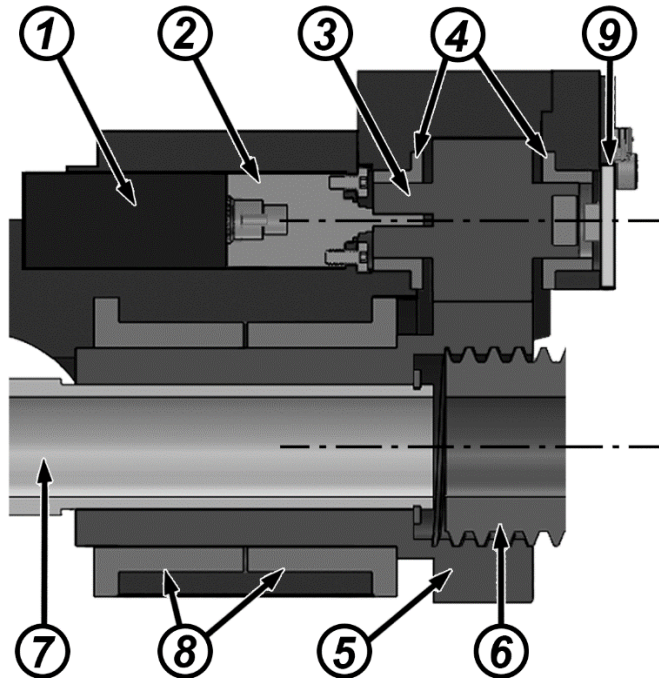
Cross-section of servo subsystem, showing: (1) brushless DC motor; (2) planetary gearhead; (3) pinion; (4) pinion bearings; (5) output gear; (6) nozzle housing; (7) valve outlet tube; (8) output gear bearings; and (9) absolute encoder.
